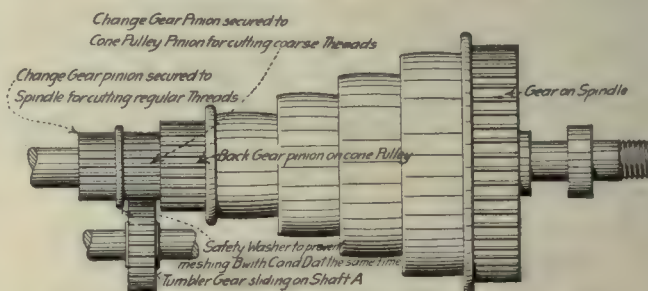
ARRANGEMENT OF EXTRA PINION AND TUMBLER GEARS
